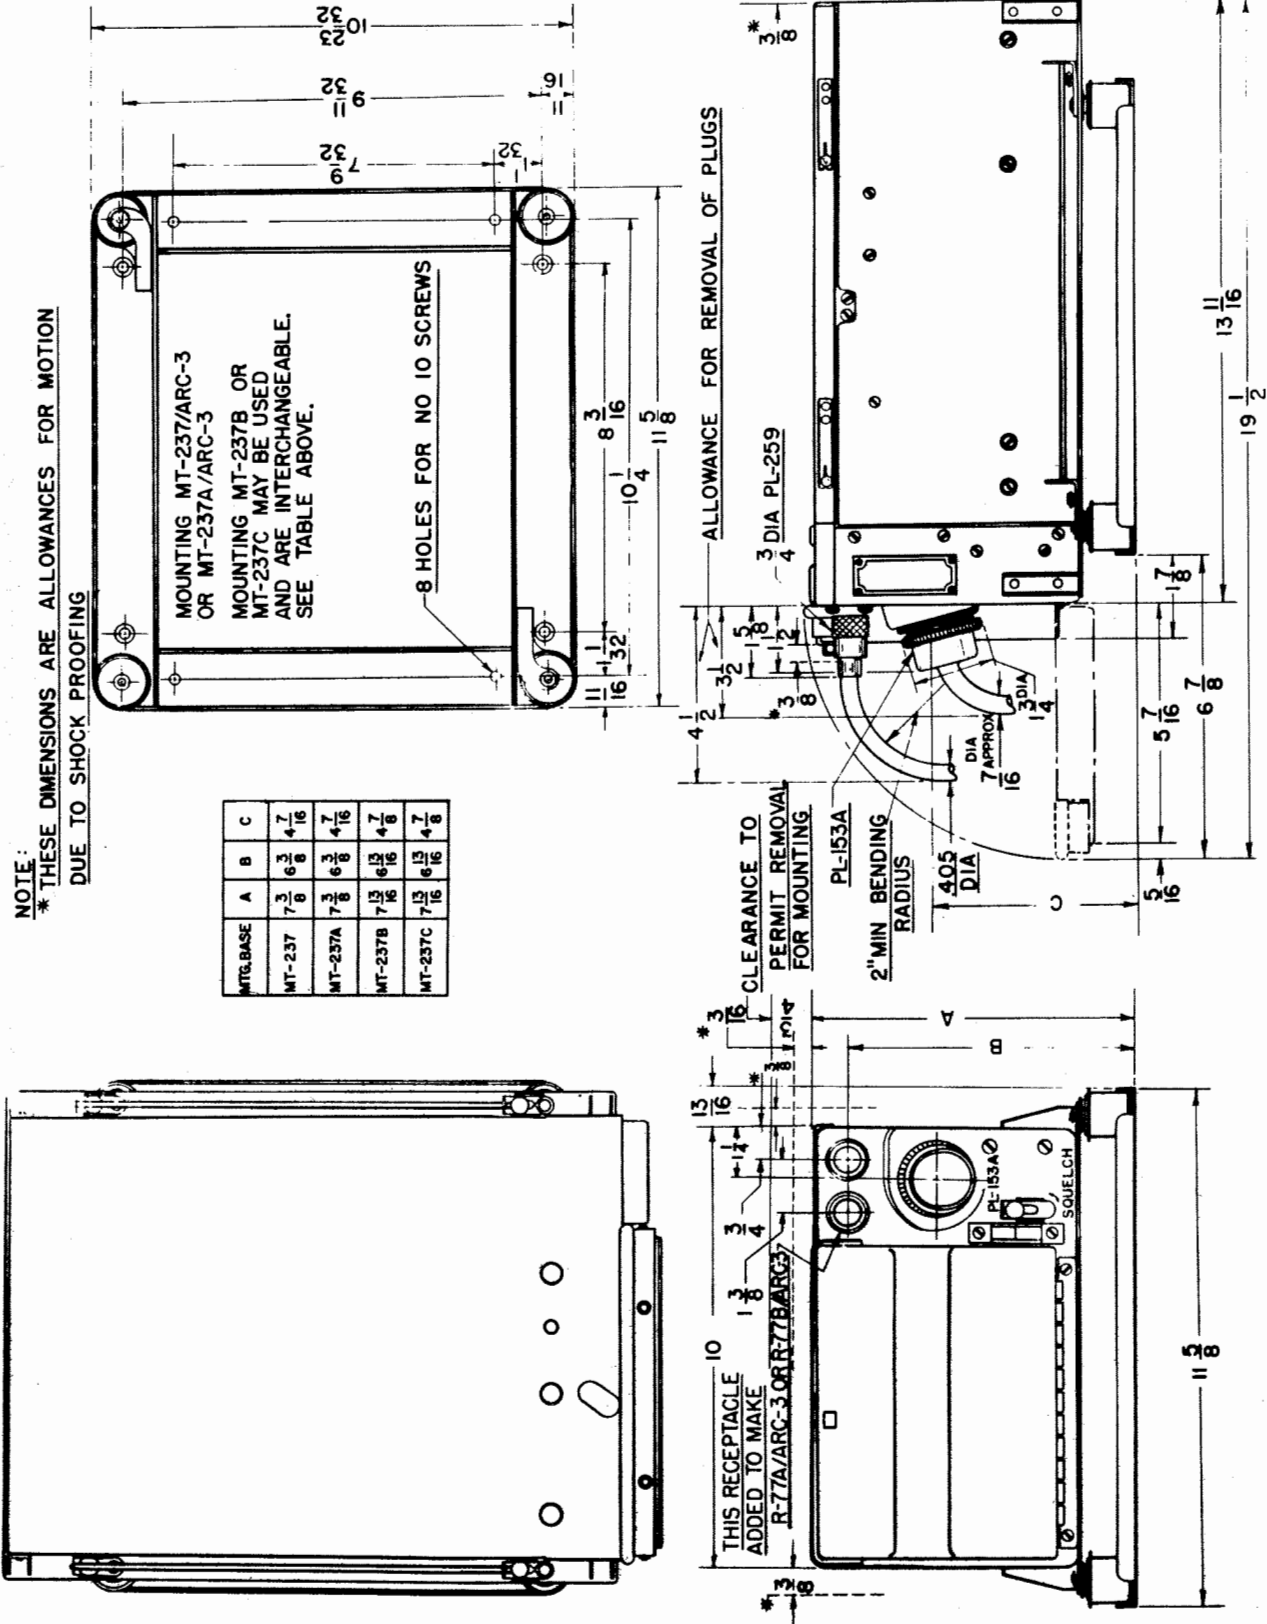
Radio Receiver R-77/ARC-3, R-77A/ARC-3 or R-77B/ARC-3—Outline Drawing and Mounting Dimensions
